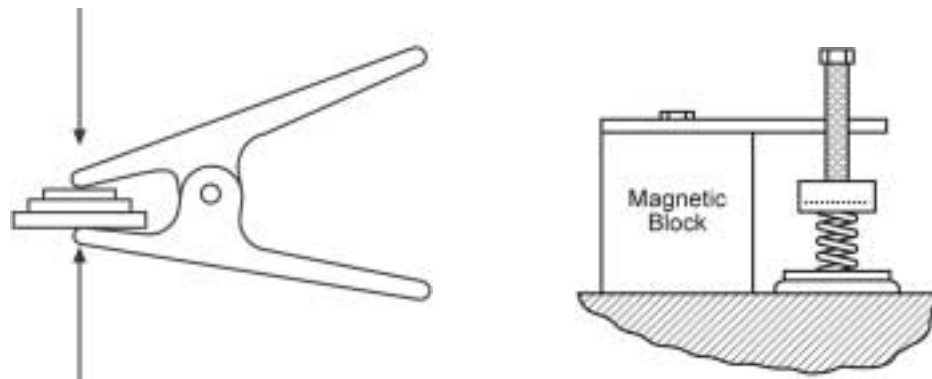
Two clamping techniques. Left: common spring clamp Right: clamp with magnetic block
